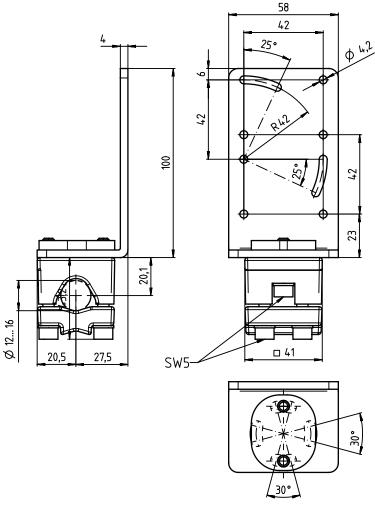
Dimensioned drawing BT 300-1 mounting device
